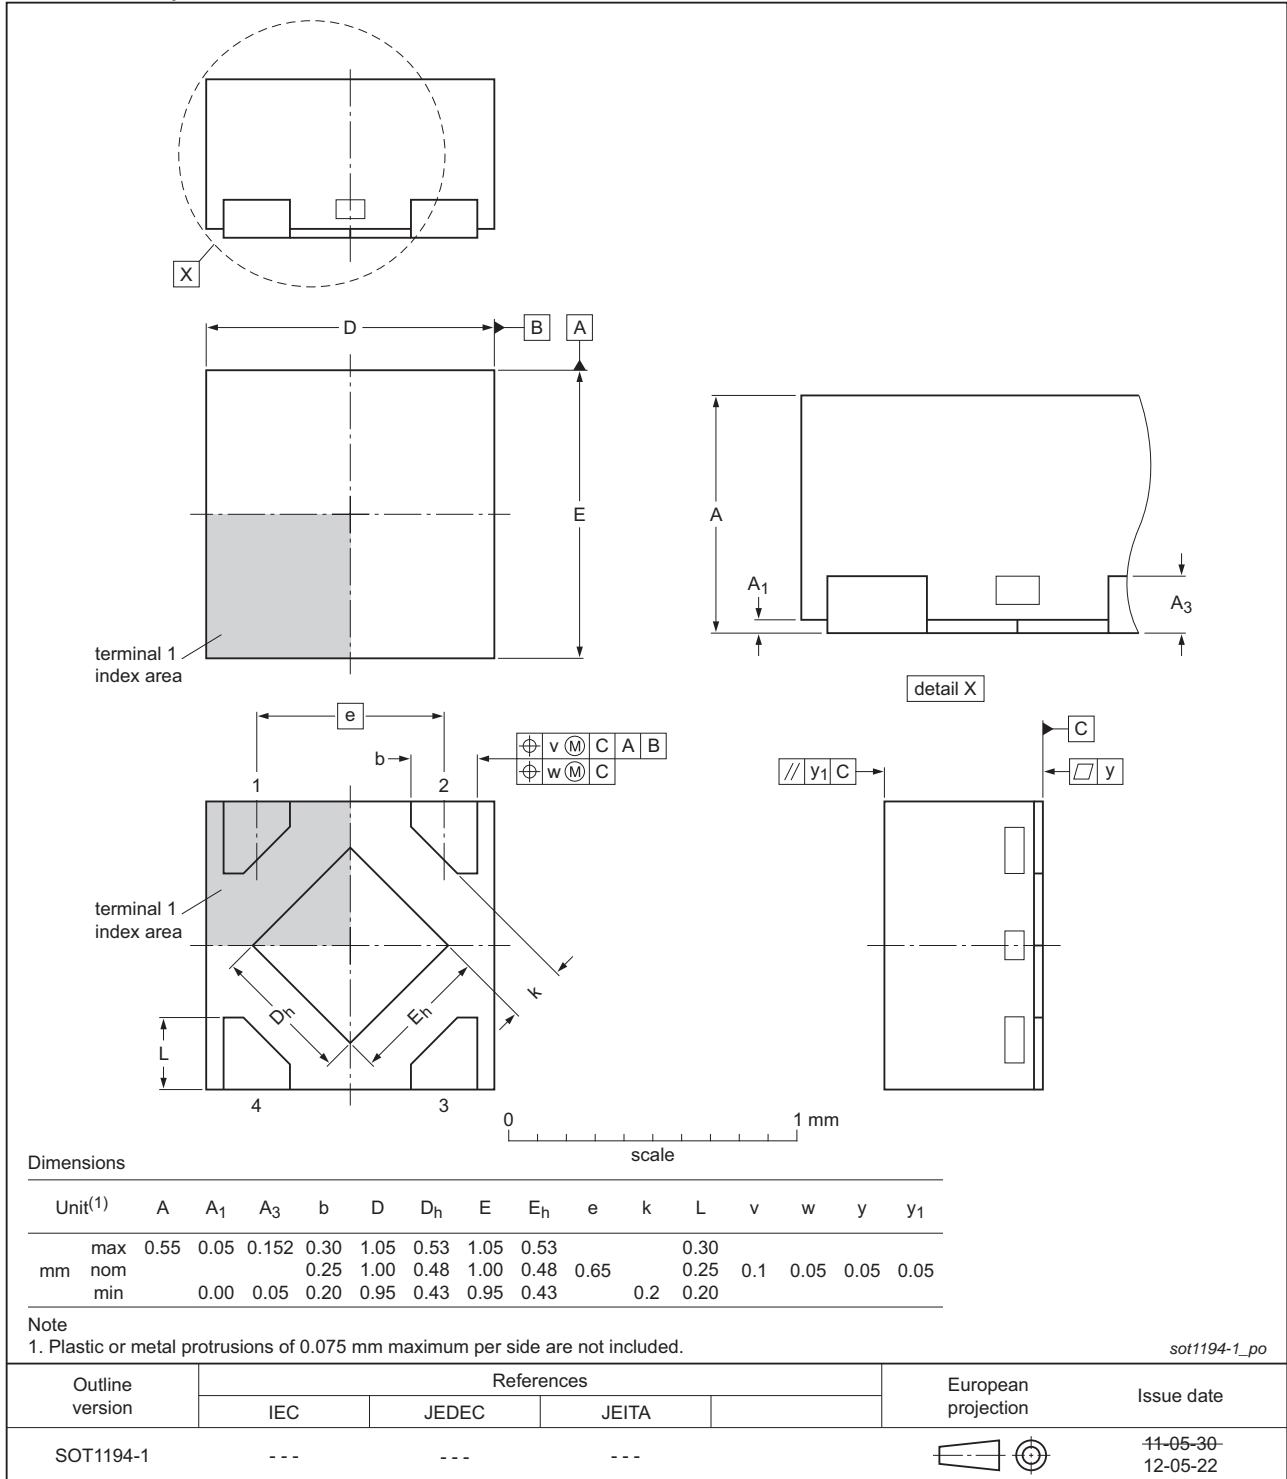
Package outline DFN1010C-4 (SOT1194-1)
